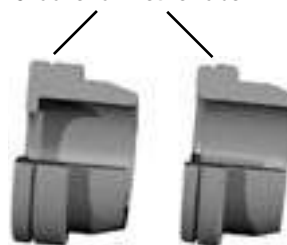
Metric (Tube) Seal-Lok Sleeves
